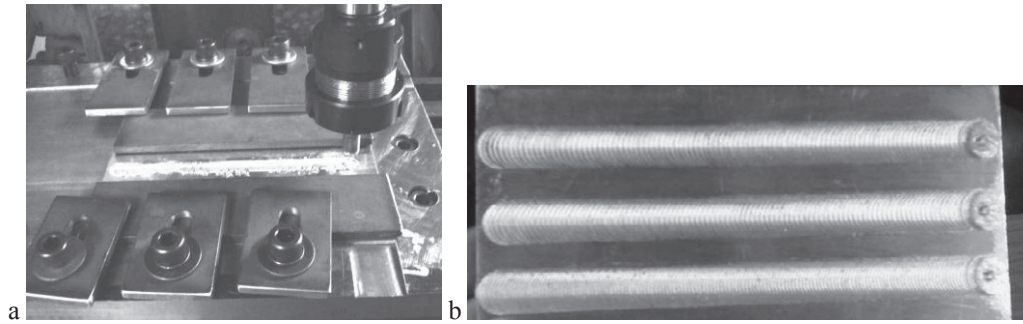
(a) processing by friction-stir; (b) as-processed sample
